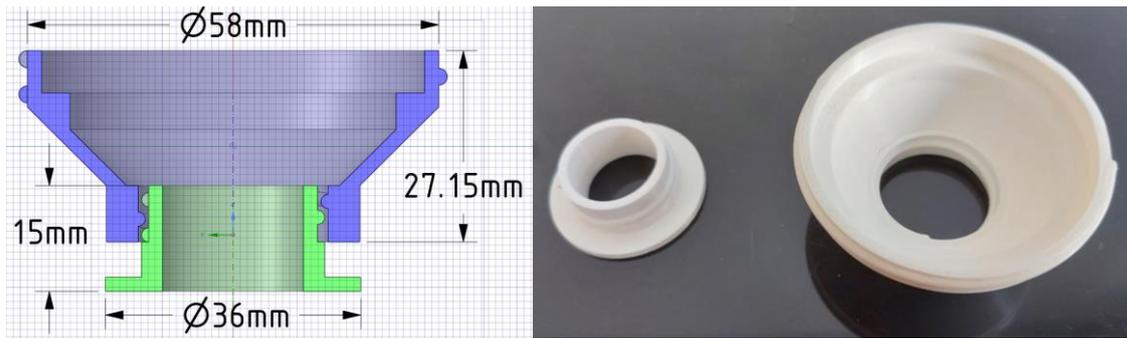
Frontal adapter V4. The photograph is in scale with the model.
